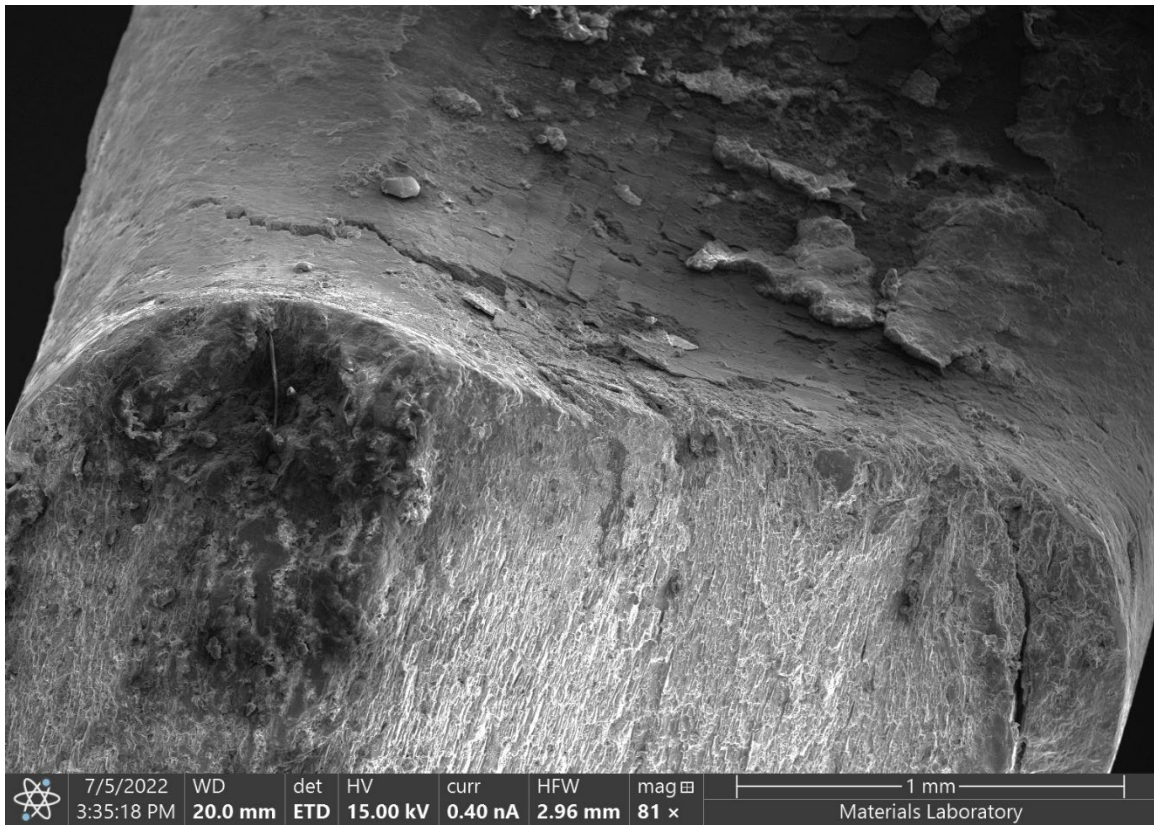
SE micrograph of the inside corner of the fracture surface of the opposite riveted A-clip arm, showing tearing near and along the fracture.
